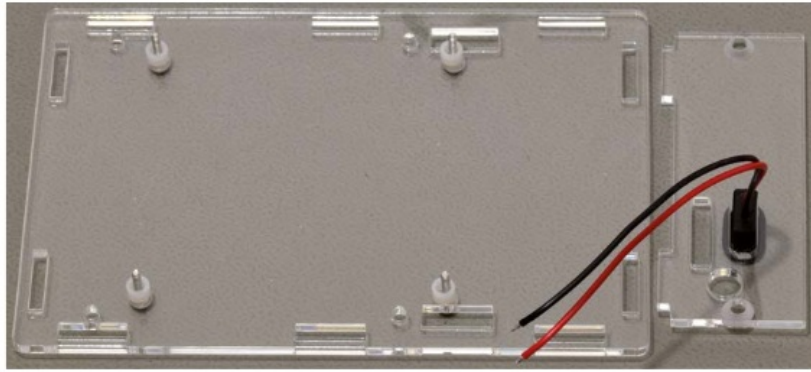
USB socket placed in the back panel. Screws, washers and standoffs in the bottom panel.
